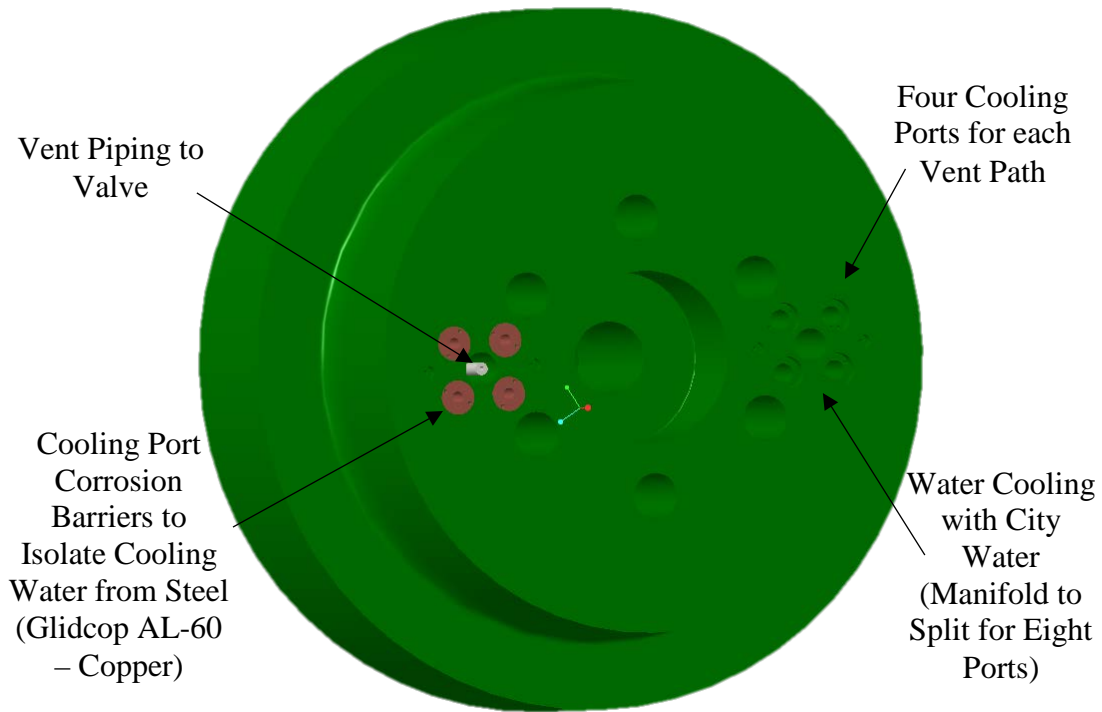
Modified Closure Plug with Stand Pipe, Seal Head & Commercial Piping
